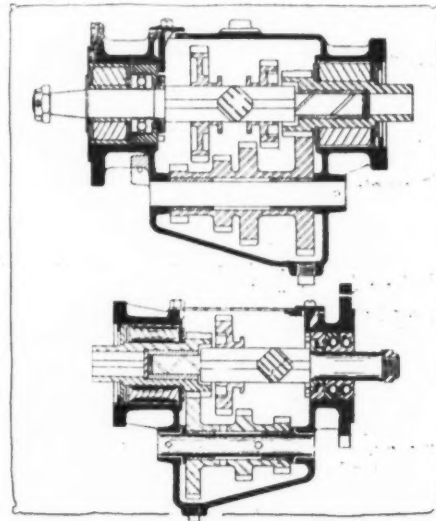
Lefever small car gearsets. The upper one has three speeds and is for machines up to 20 horsepower, while the lower is a two-speed design for cars of 15 horsepower or under
